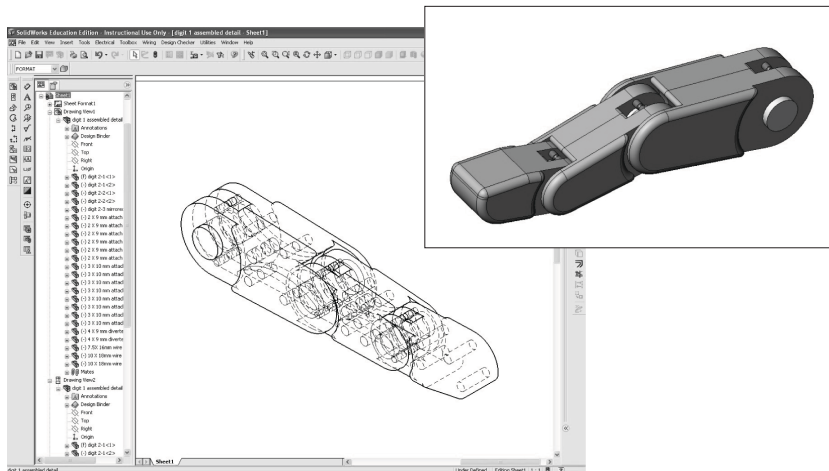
SolidWorks assembly of a finger mechanism to be used in fingerspelling robotic hand (transparent view- left; solid view right).
